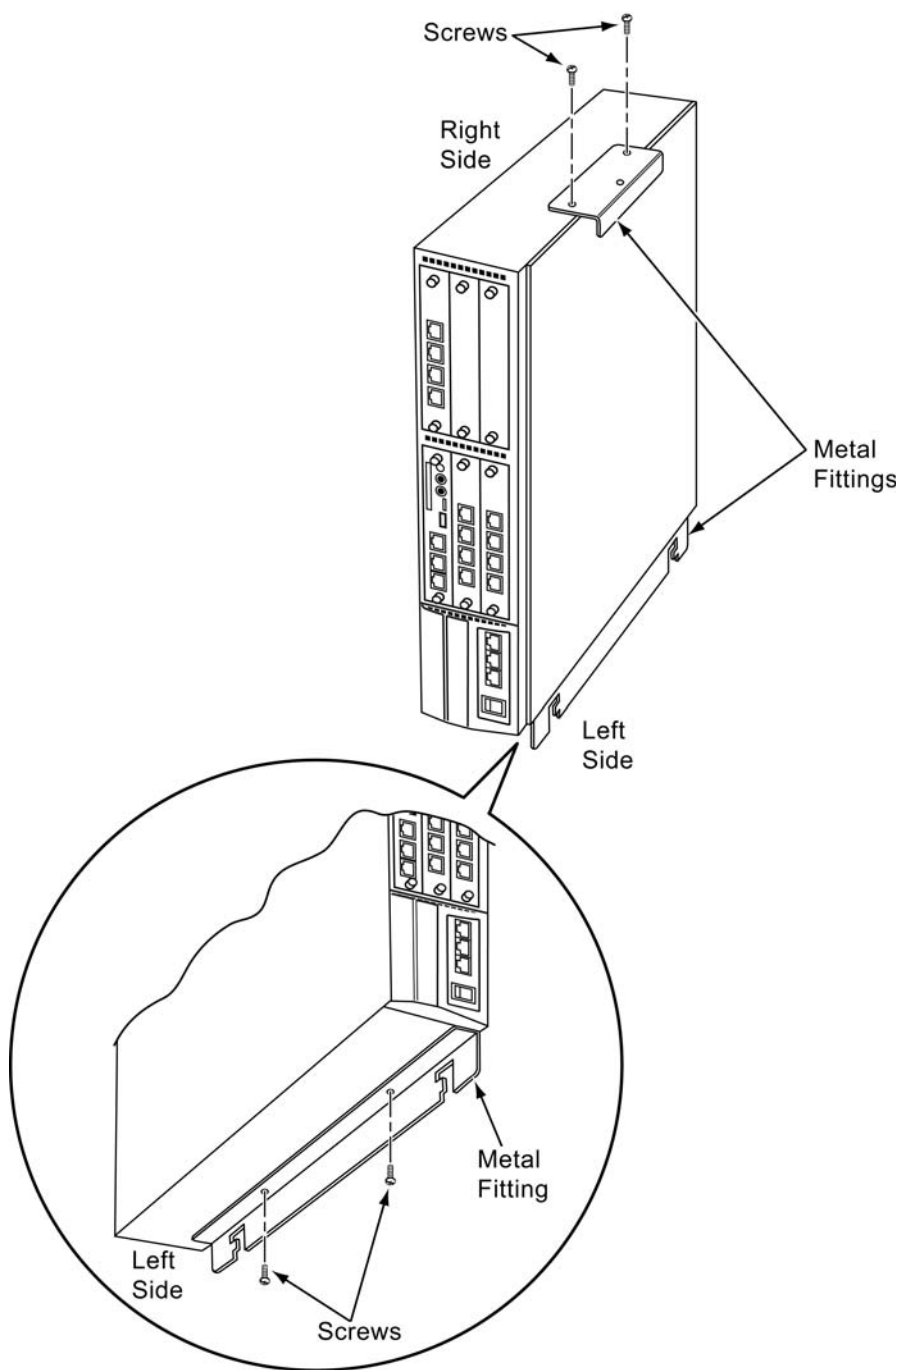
Securing Metal Fittings to Chassis with Screws
